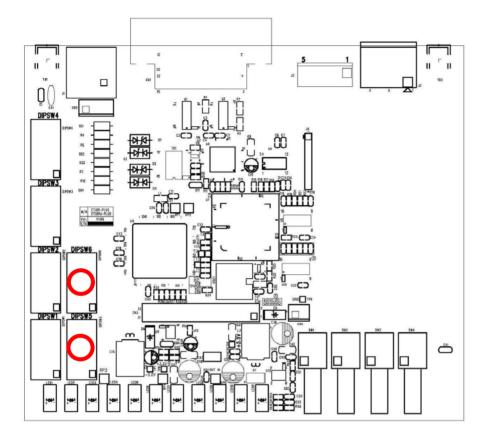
ETU01U DIP Switches, Version 1.2G PCB
